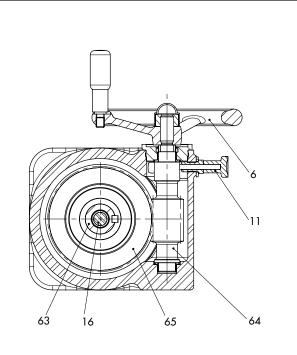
Sectional drawing of Type 3273 Side-mounted Handwheel, for up to 30 mm rated travel
